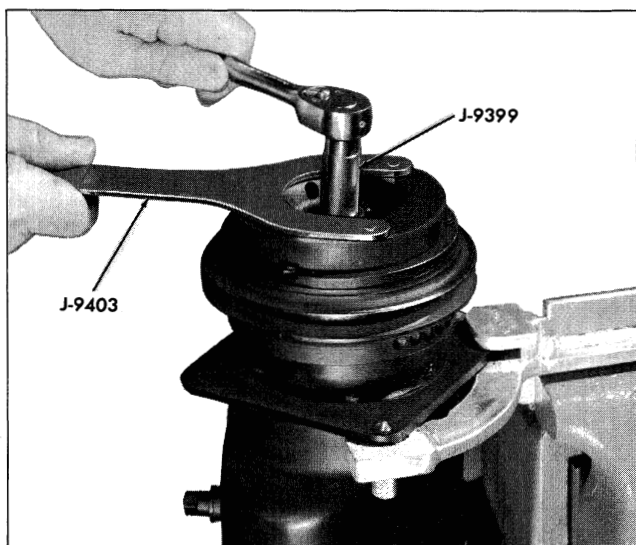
Removing Hub and Drive Plate Lock Nut
